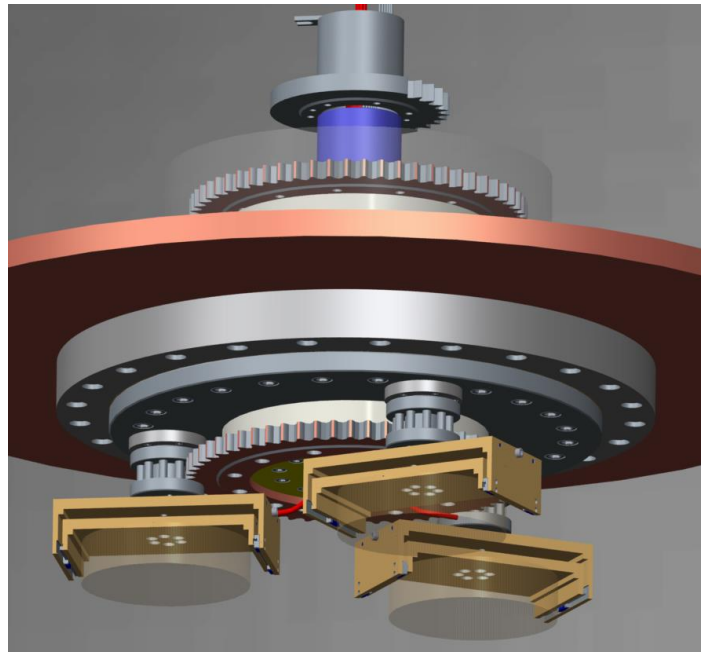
Rendering of the drive. Evident are the robust rotational bearings, three substrate platens, and the roller pinion gear drives.
